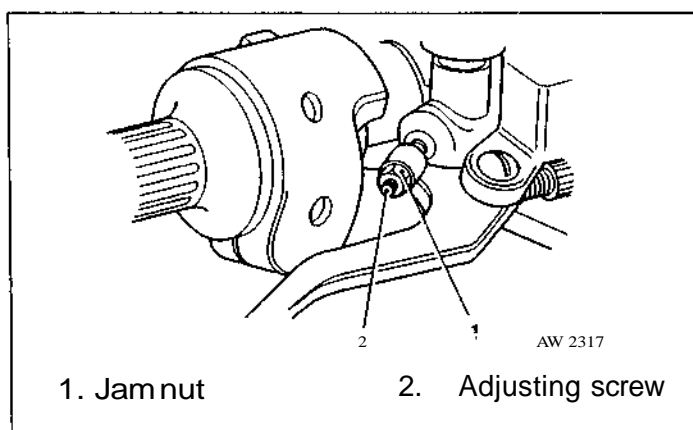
Front Brake Control Lever Free Play Adjustment
